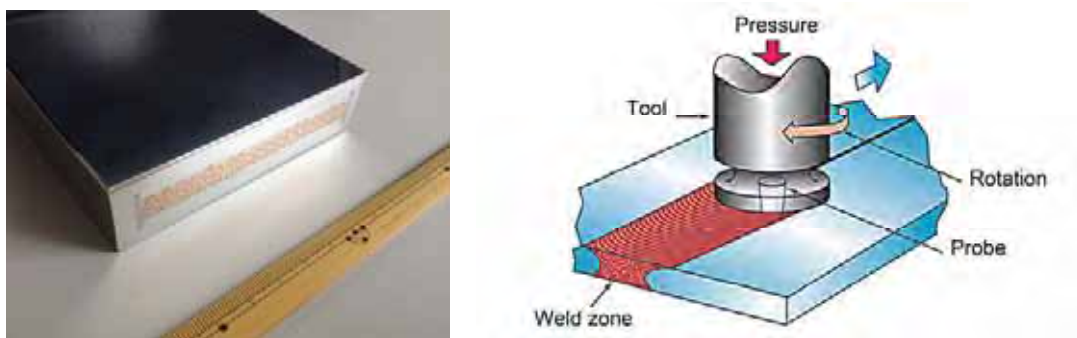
Photograph of the prototype indirectly cooled superconductor (left) and conceptual scheme of friction stir welding (FSW) (right).
